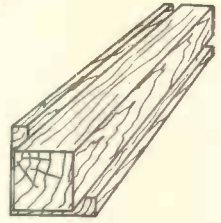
THE CORNER MOULDINGS READY FOR INSERTING INTO BASE OF CABINET.
